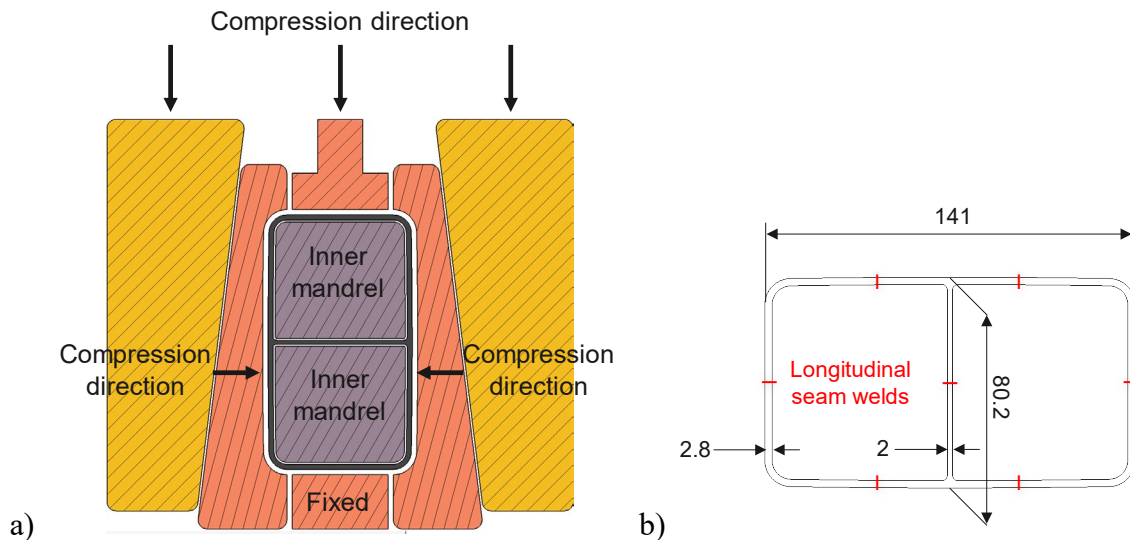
a) Schematic of the compression calibration setup and tool movement directions b) Sketch of the multi-chamber hollow aluminum profile and longitudinal seam weld positions
